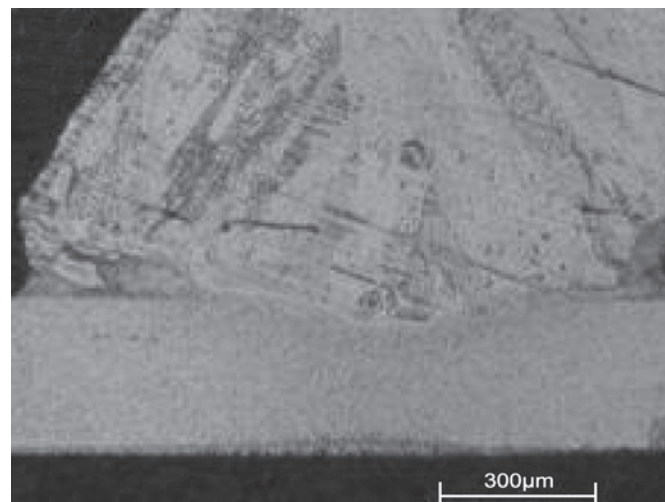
Laser beam welded joint: longitudinal section picture of the welded joint (b)
